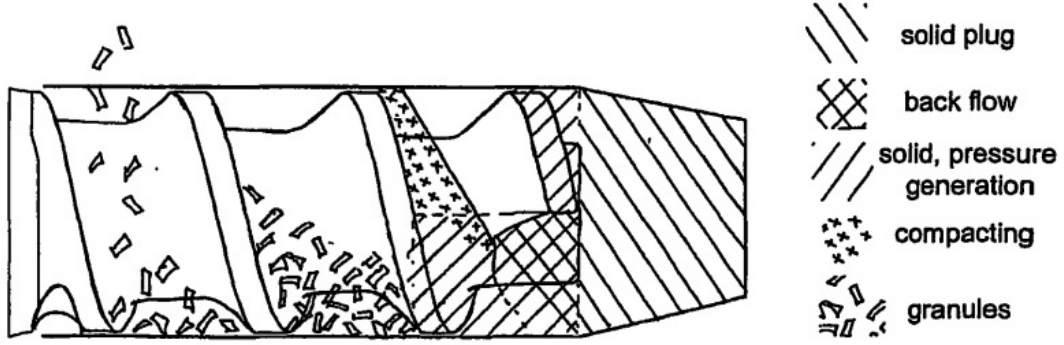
Principal sketch of the screw extruder showing granule feeding and pressure build-up. Figure from [6].
